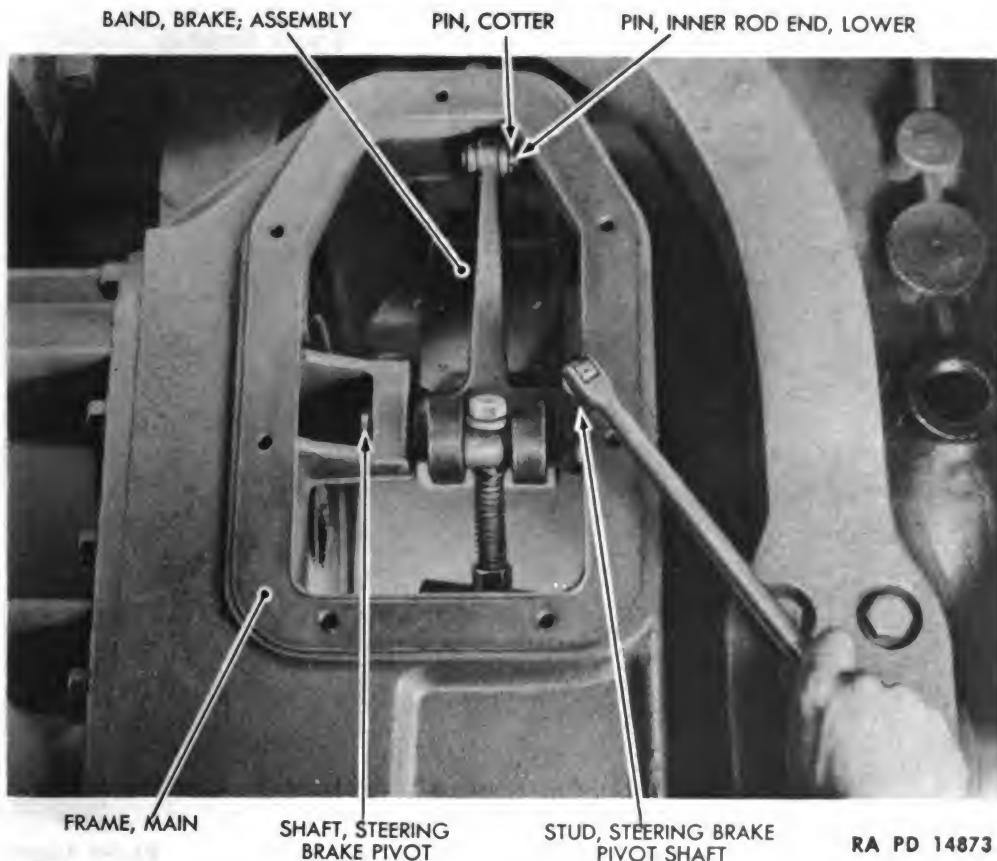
Steering Brake Pivot Shaft Stud Removal
